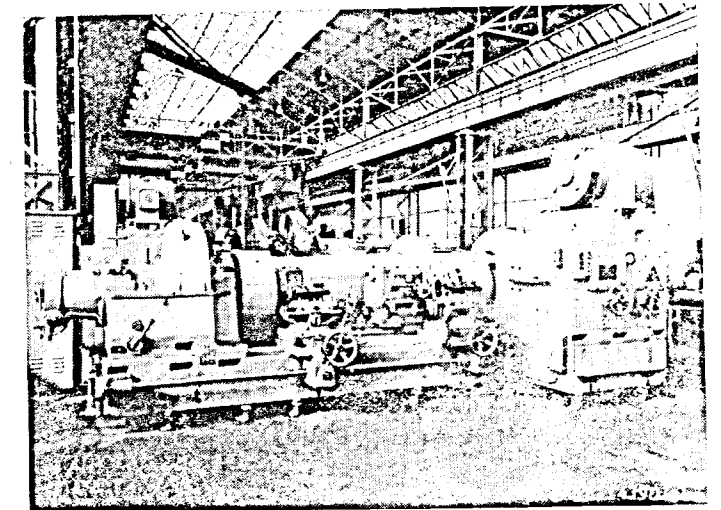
MFD Wheel lathe for wheel sets with outside journals.
